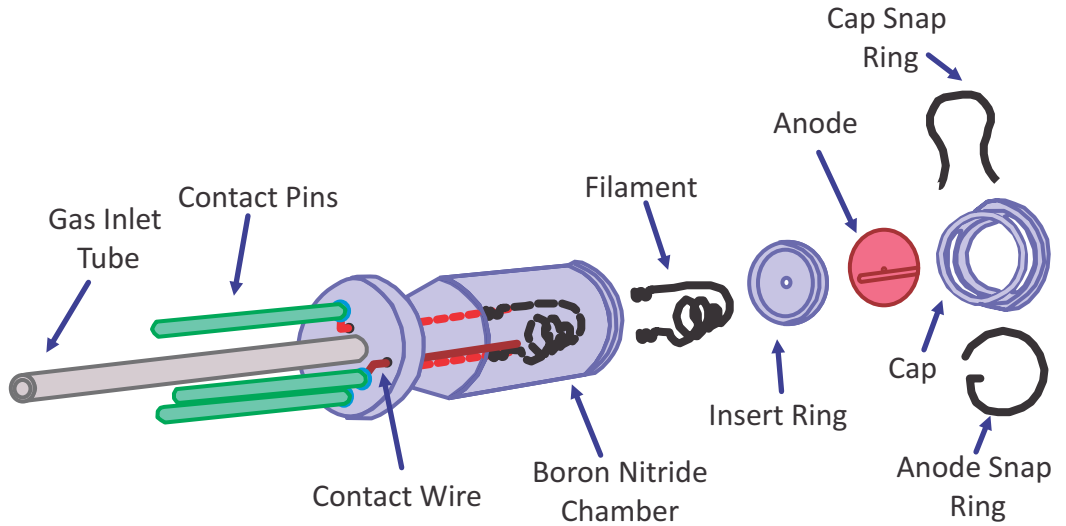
Exploded view of the Colutron Plasma Ion Source components. The charge holder is not shown in this view.
